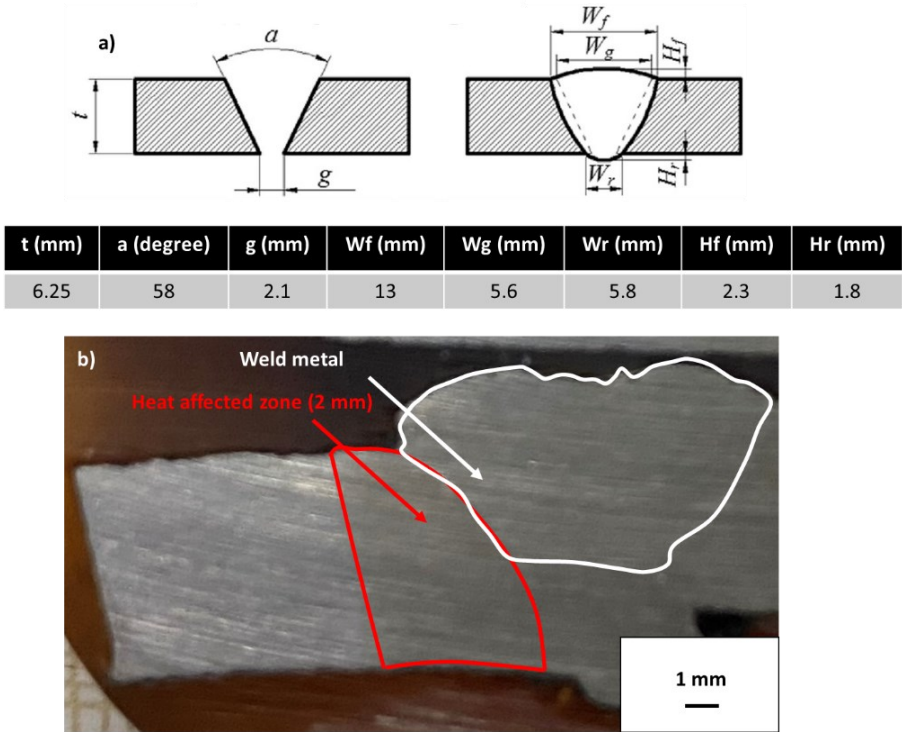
a) Geometry of single-V girth weld on the selected specimen and b) picture of weld metal and heat affected zone on the specimen.
